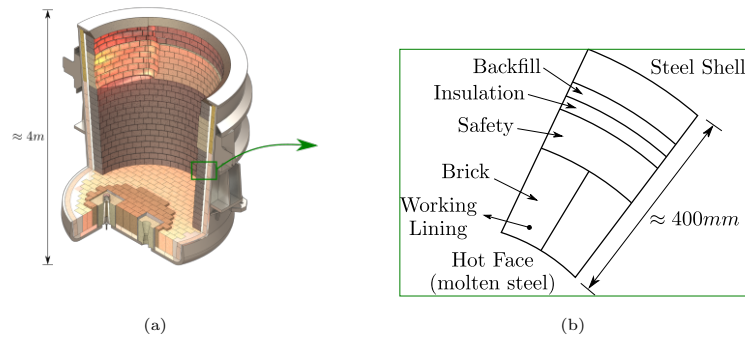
Example of a steel ladle. (a) Cutaway view showing the refractory linings. (b) Schematic representation of a line ring, top view.
